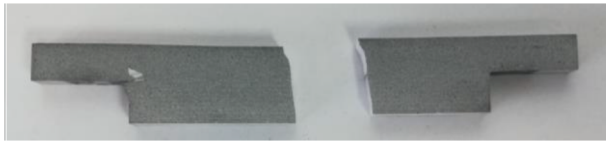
Type 2 - Central failure of a composite bend specimen. Specimens have been painted to allow DIC to be performed.
